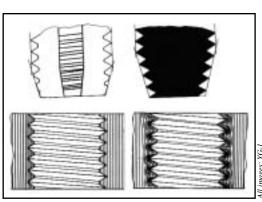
A cold-forming tap plastically deforms the workpiece material when producing a thread. No material is cut during form tapping, making it a chipless operation. Shown clockwise from upper left: Cutting tap; cold-forming tap; formed thread; cut thread.
